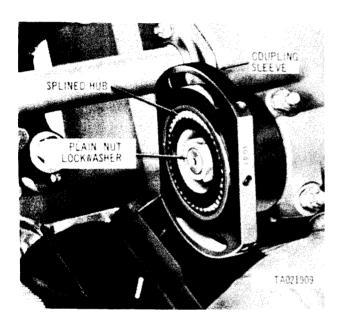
Removing or installing, fuel injecton pump coupling from gearshaft.
